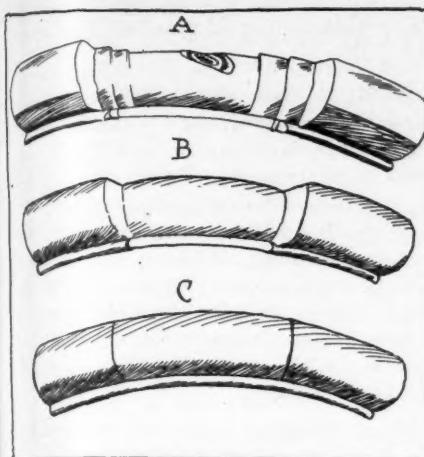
STEPS IN SECTIONAL REPAIR OF CASING
